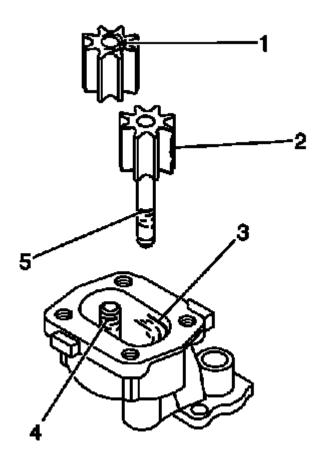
Inspecting Oil Pump Housing & Gears, Idler Shaft, & Drive Gear Shaft Courtesy of GENERAL MOTORS CORP.
